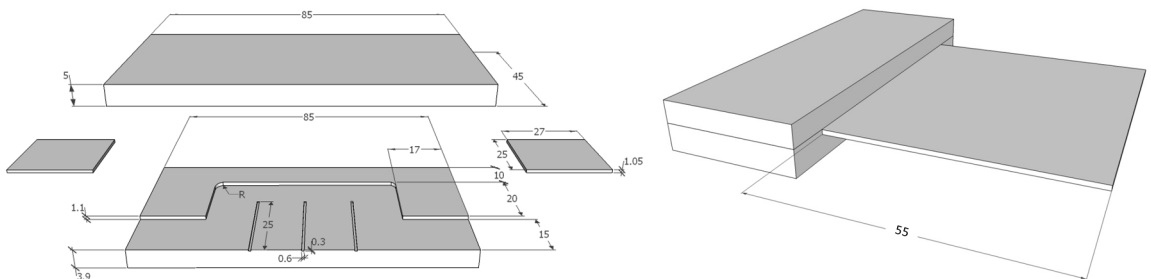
Three dimensional sketch of the Pyrex[®] pieces that were glued to the wafers (left), and of the assembled pieces (right) in the first setup.
